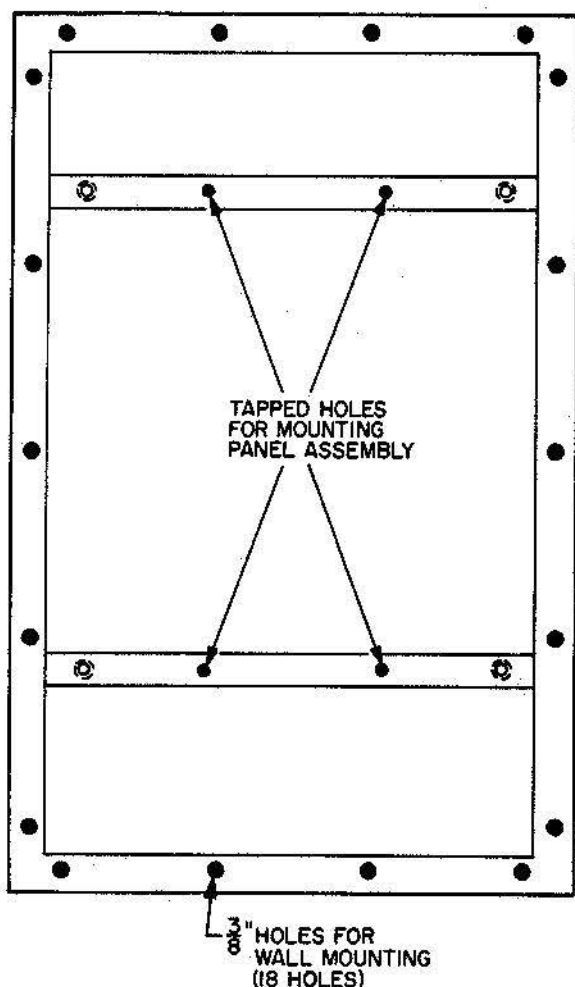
Hole Location Surface Mounting Enclosure 424102.
